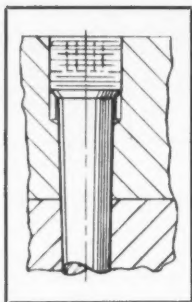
Large end of taper pin illustrated here is hollow head set screw.
